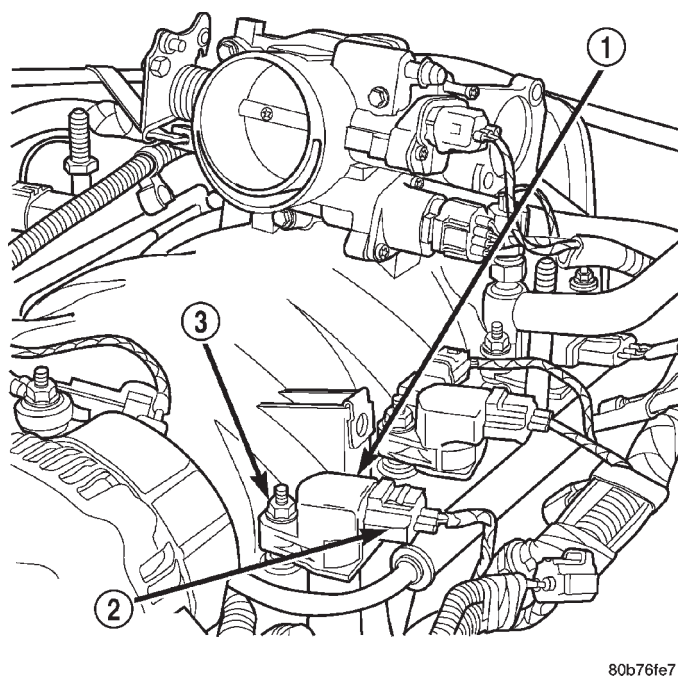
Ignition Coil Rail Location—4.0L 6-Cylinder Engine
